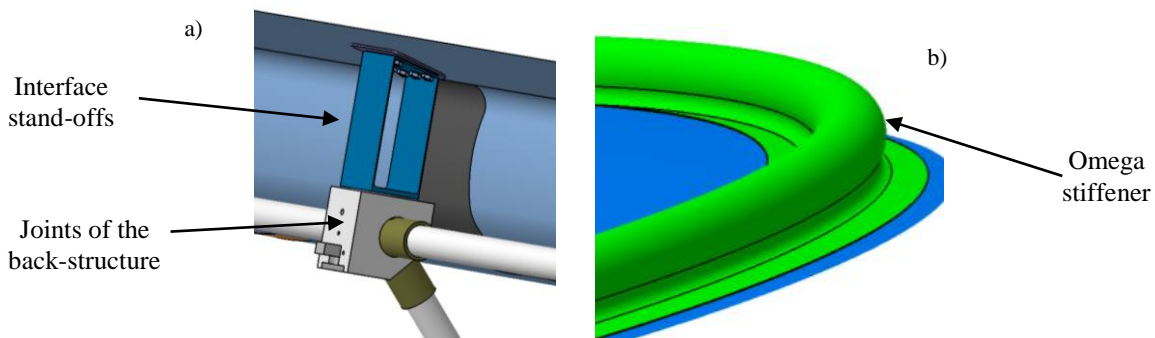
Details of the demonstrator design: (a) metal joint of the truss, CFRS surface and an interface stand-off, (b) omega-shaped stiffening ring of the shell-membrane surface
